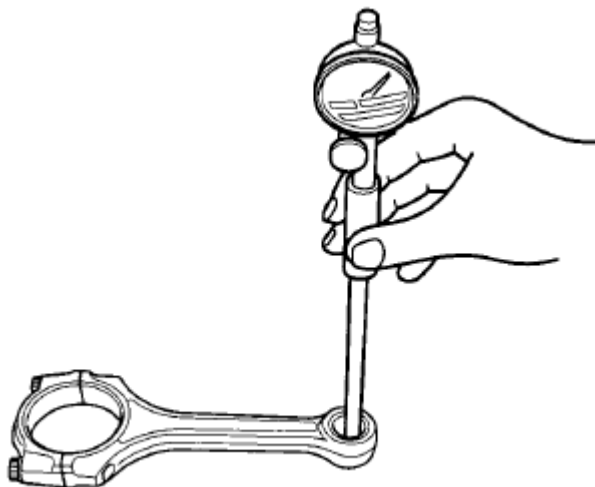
Checking Piston Pin-To-Connecting Rod Clearance
